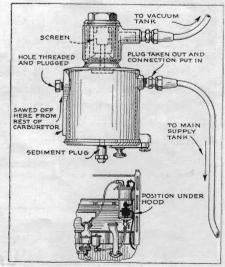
Old carburetor, with float and mixing chambers separate, makes good gas strainer.
